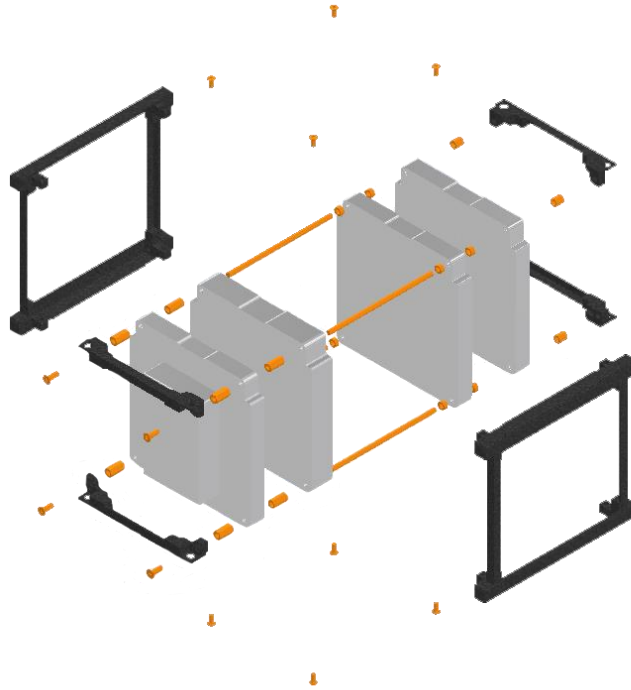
Exploded view of the 1U CubeSat structure including internal dummy components
